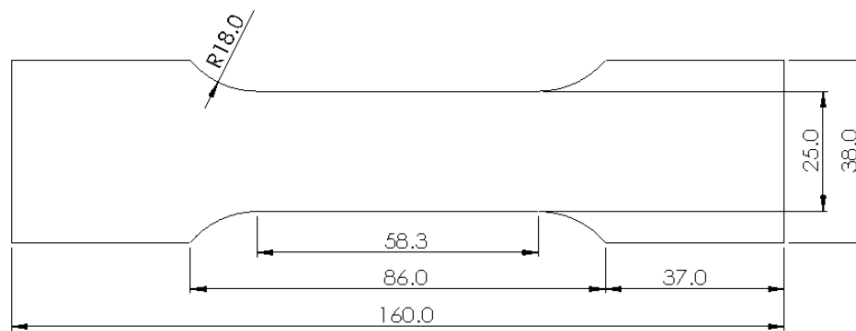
Uniaxial tension specimen geometry. All dimensions are in millimeters [9].
